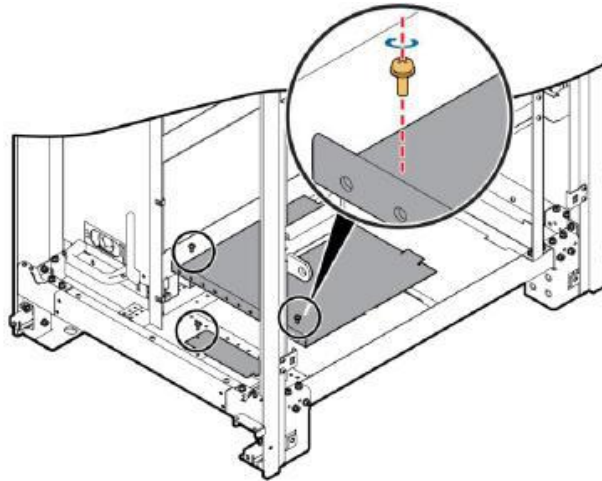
Removing the bottom cable tray covers (500 kVA)
